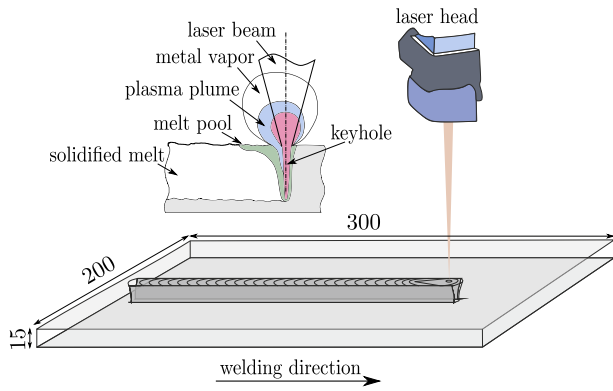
Schematic bead-on-plate laser beam welding process.
